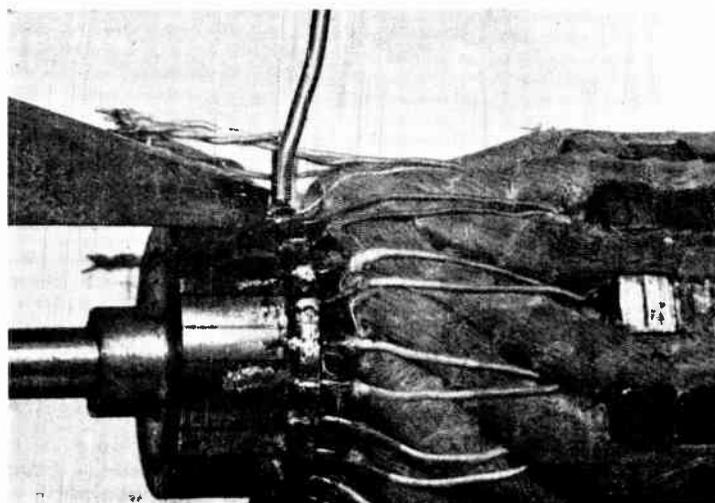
SOLDERING ONE OF THE CONNECTIONS TO THE COMMUTATOR. Resin-cored solder gives a clean joint.
